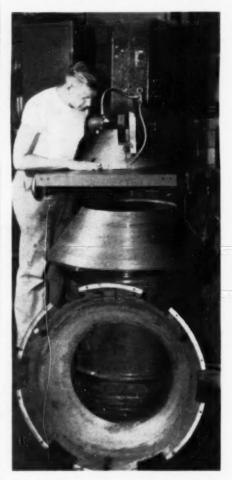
Illustration showing method of contour machining a steel commutator clamping ring
